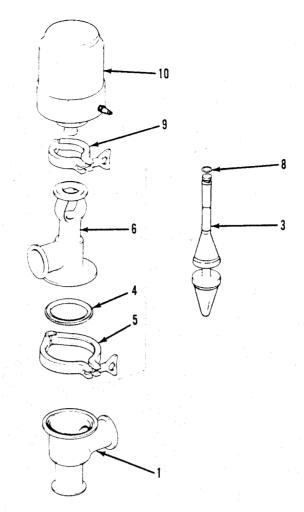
Type 371-21 Throttling Divert Valve, Exploded View
